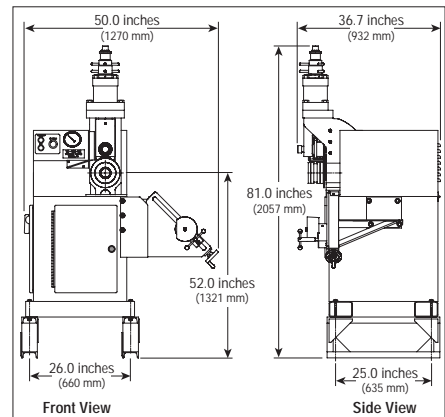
VE436MC and VE424MC with 26 - 36-inch Kit Tool Mounting Pattern
